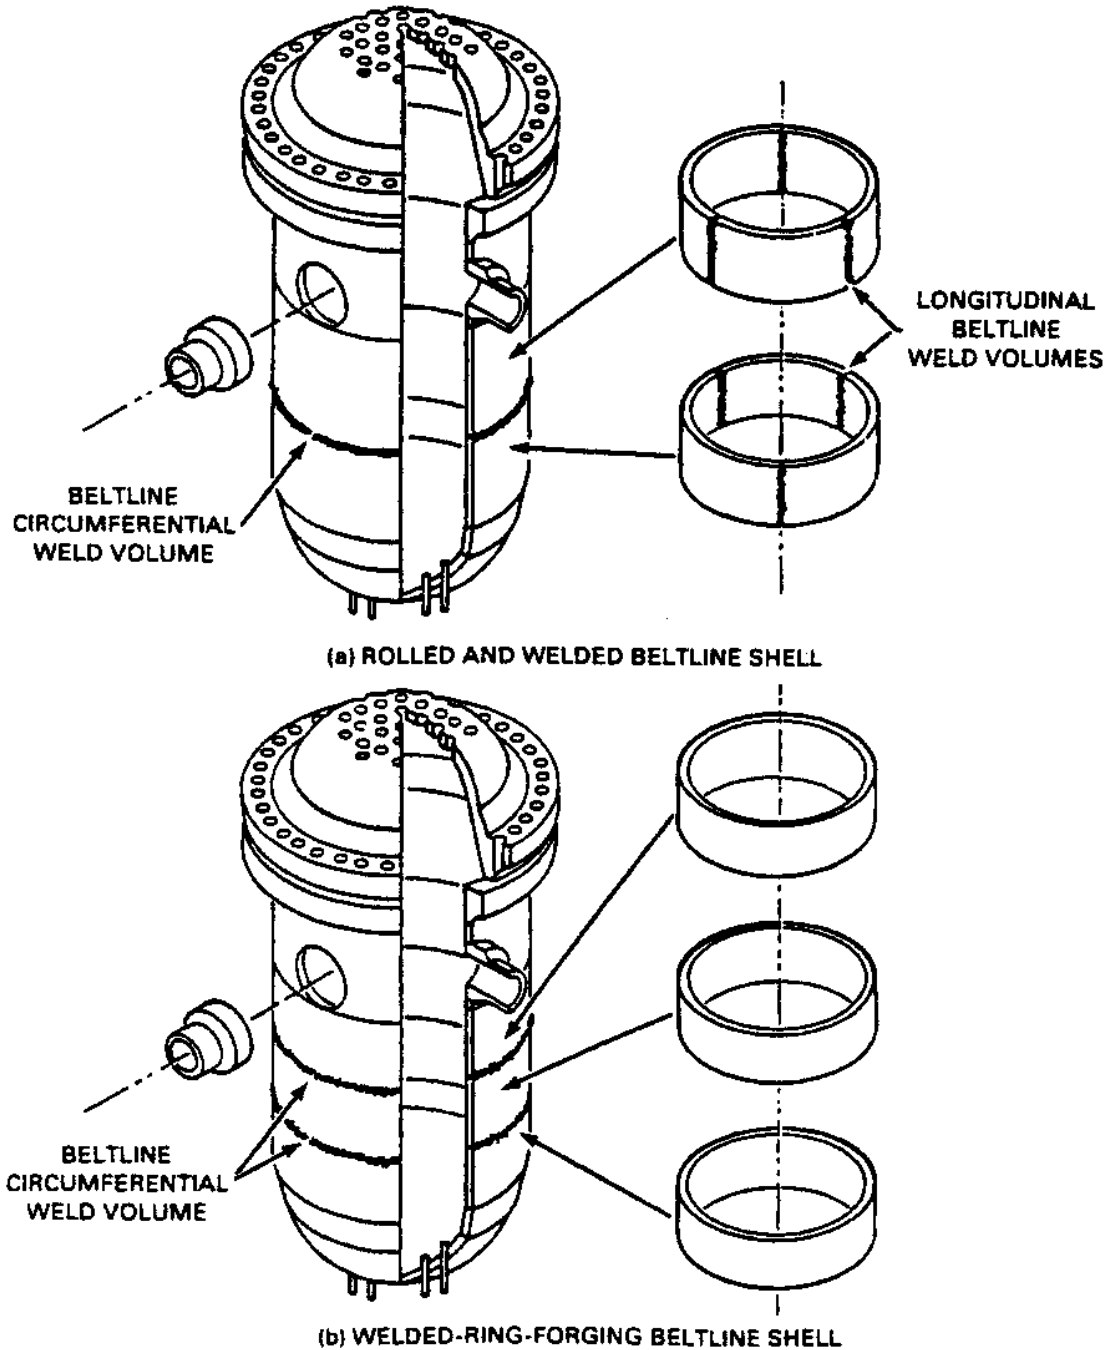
Fabrication configurations of PWR beltline shells (adapted from [3]): (a) rolled-plate construction with axial and circumferential welds and (b) ring-forging construction with circumferential welds only.
